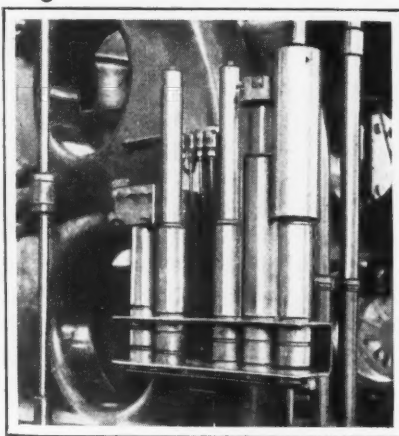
Simple Form of Tool Rack Attached to Boring Mill Housing
